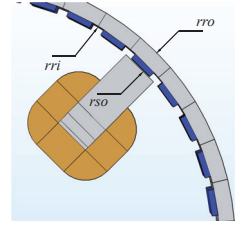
Main dimensions of the demonstrator, xy-plane.
